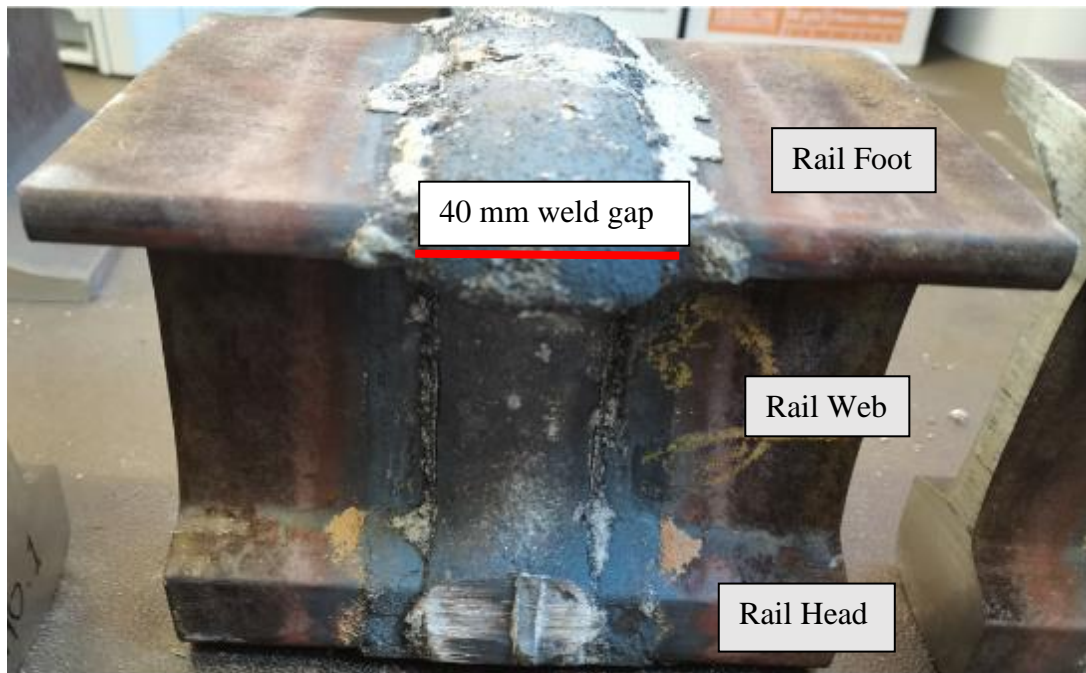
Thermite welded rail with a 40mm weld gap.
